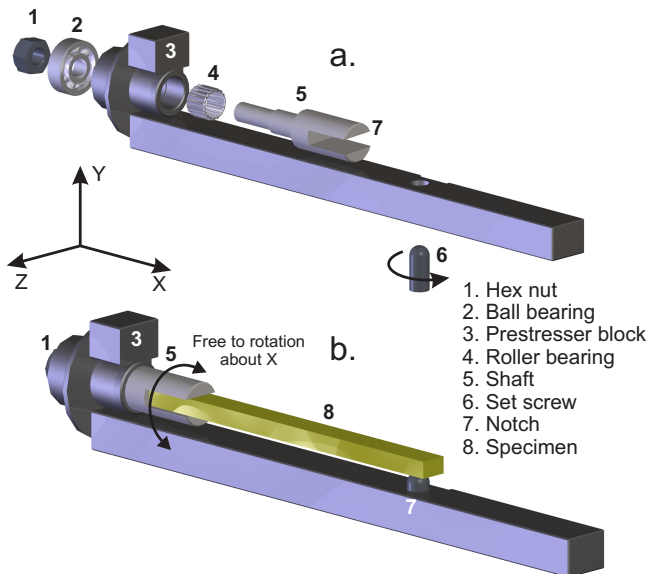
Prestress tool for the PSCB<sub>II/III</sub> test, exploded view (a), assembled state (b).
